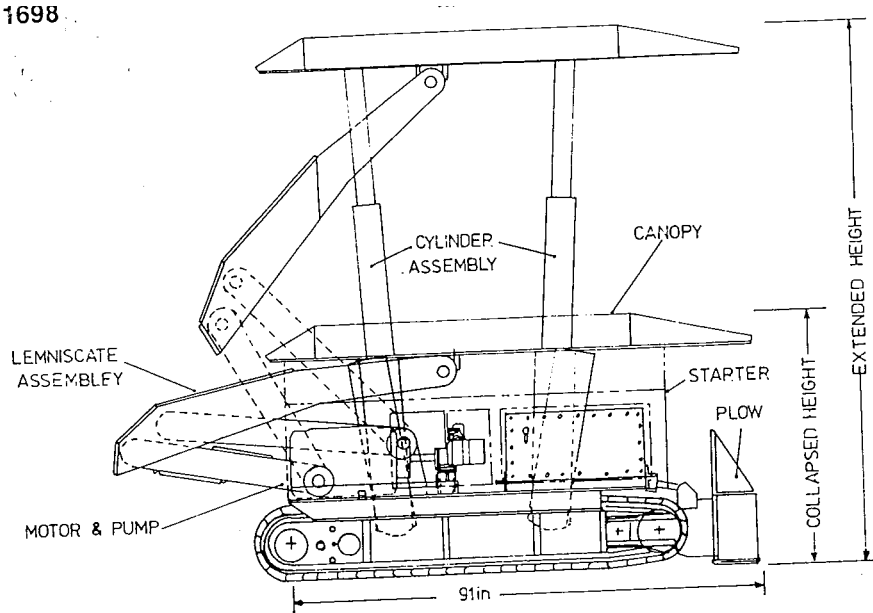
Design features of the mobile roof support. Courtesy of Fletcher Mining Equipment Co. Conversion factor: 1 in. = 25.4 mm.
